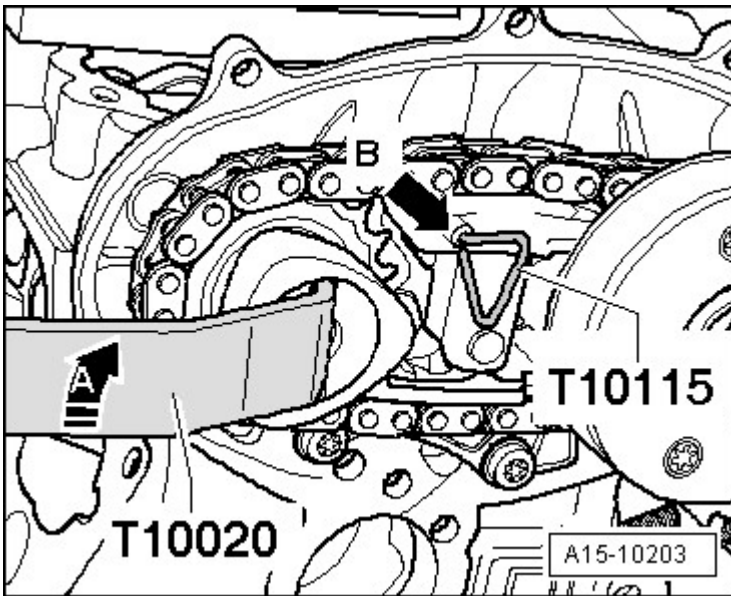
Identifying Pin Wrench T10020 To Turn Intake Camshaft Until Camshaft Adjuster Fits On Camshaft
